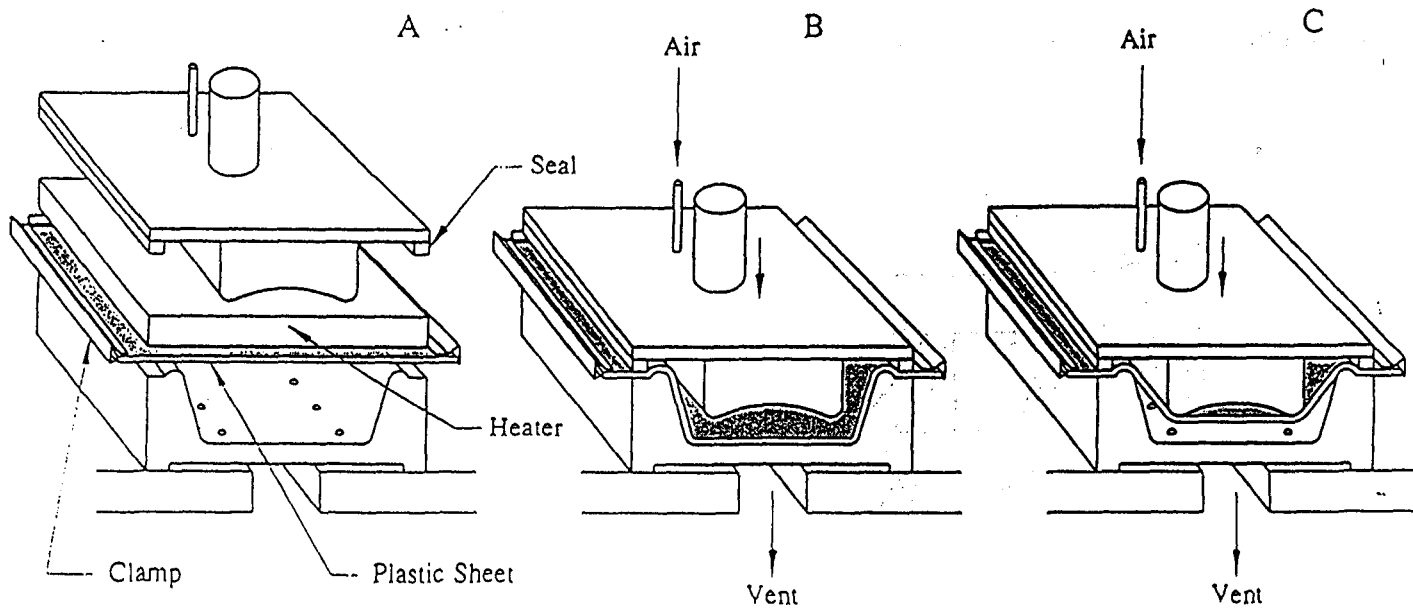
Plug-assist thermoforming: (A) preheated, clamped sheet prior to forming; (B) sheet stretched with plug advance; (C) sheet air-pressure formed into female mold.
